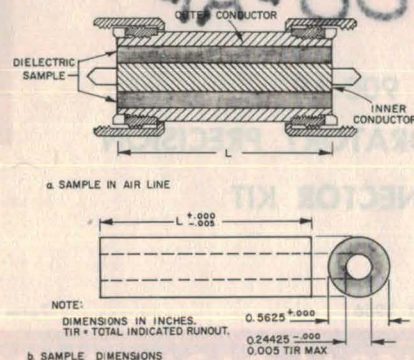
Dielectric sample fabrication for GR900 custom air line.
